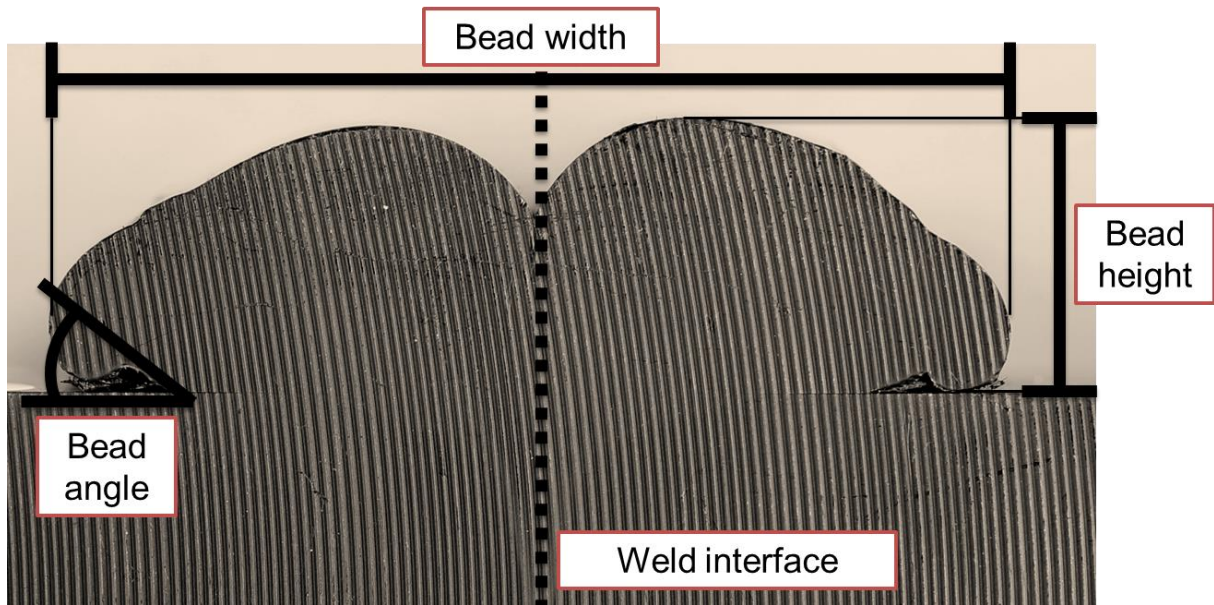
Common weld bead features with the weld interface shown by the dotted line
